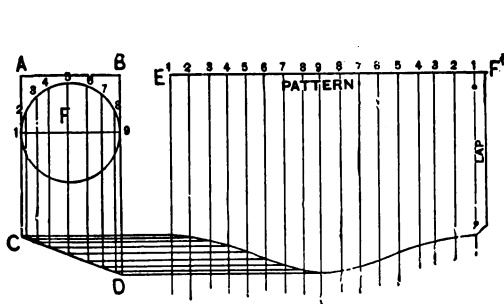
Miter Pattern for Elbow the Angle of which is Shown in Fig. 14.
